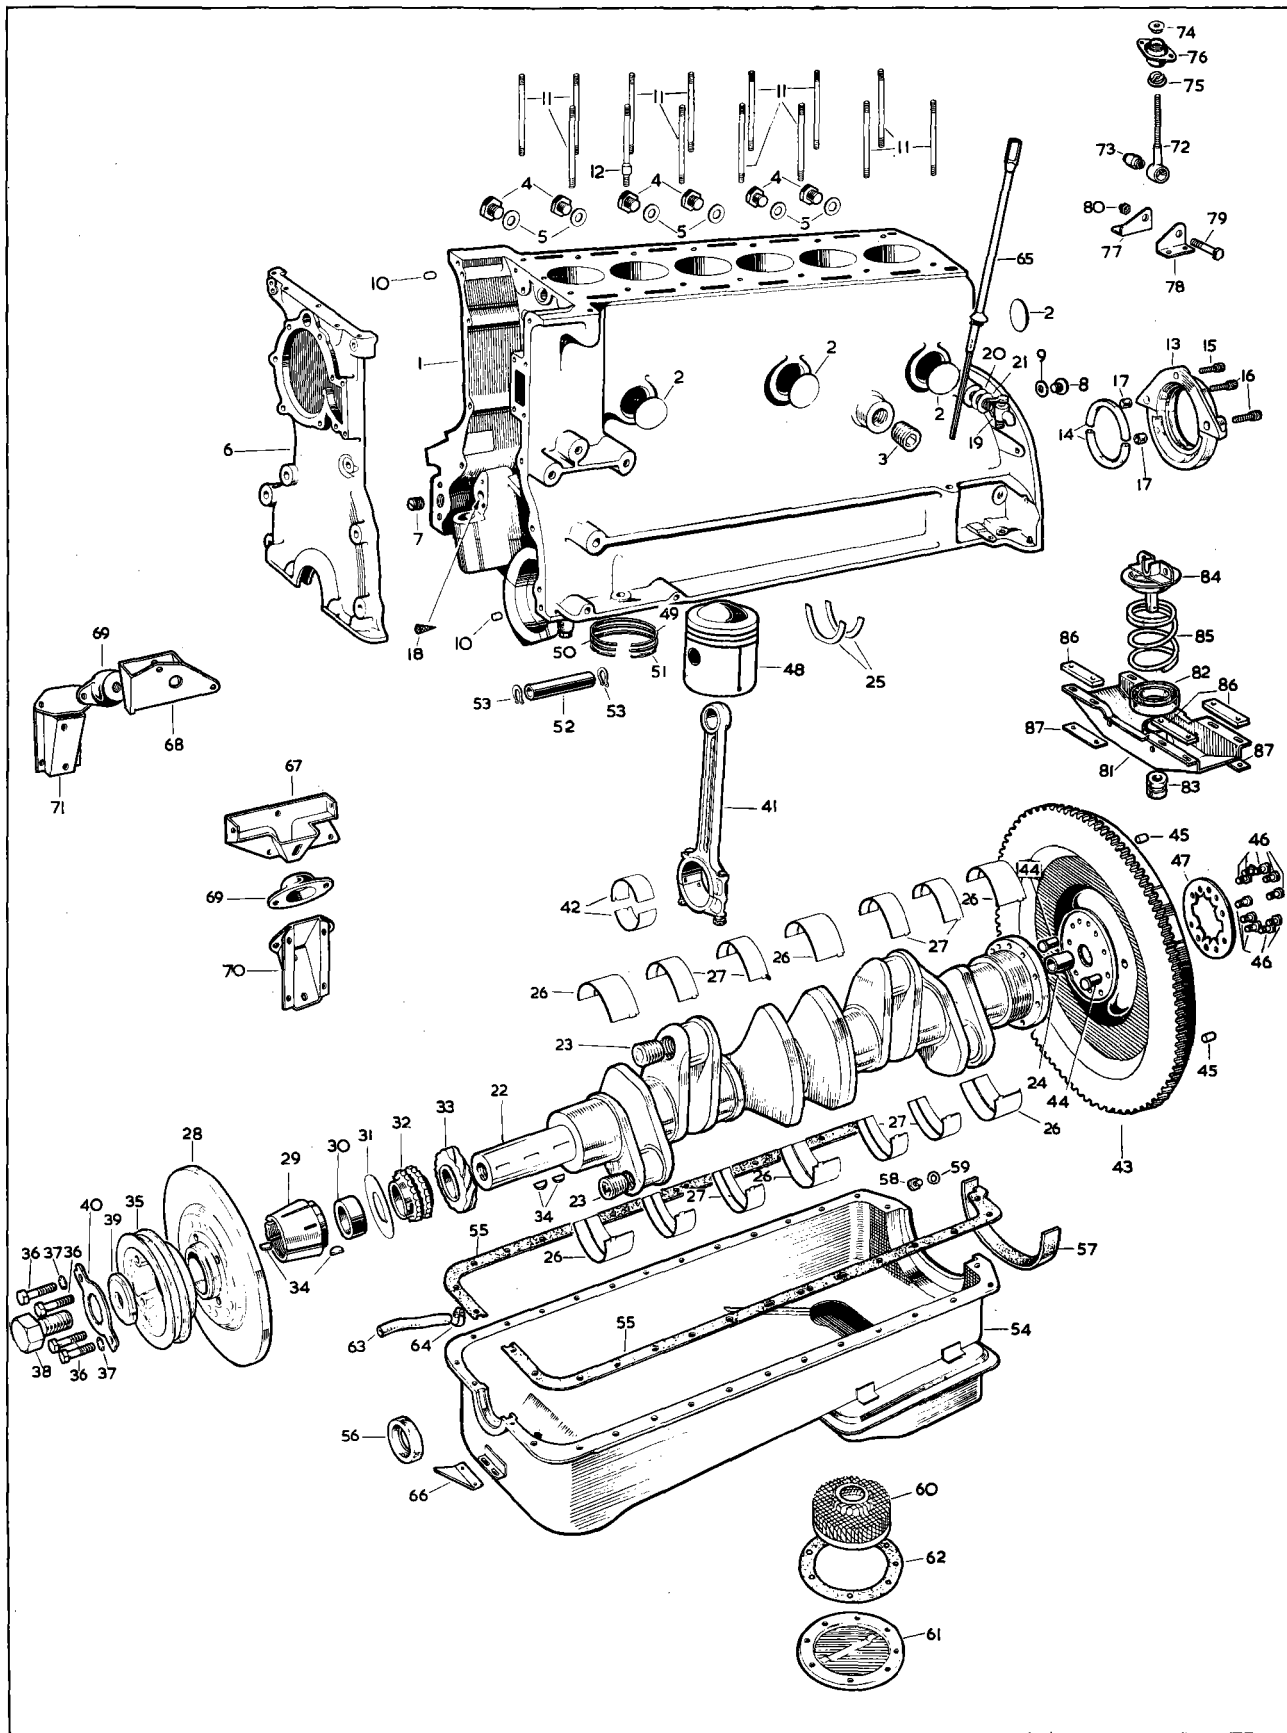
Exploded view of the cylinder block assembly (3.4/3.8 litre illustrated).
